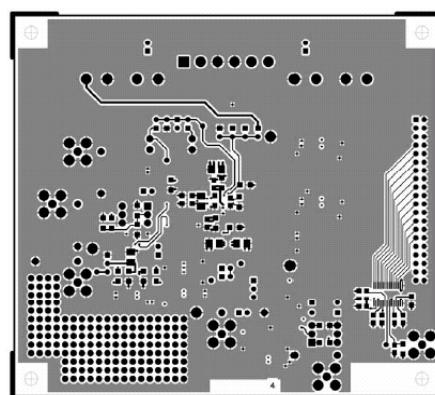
TSSOP Evaluation Board Layout, Secondary Side
